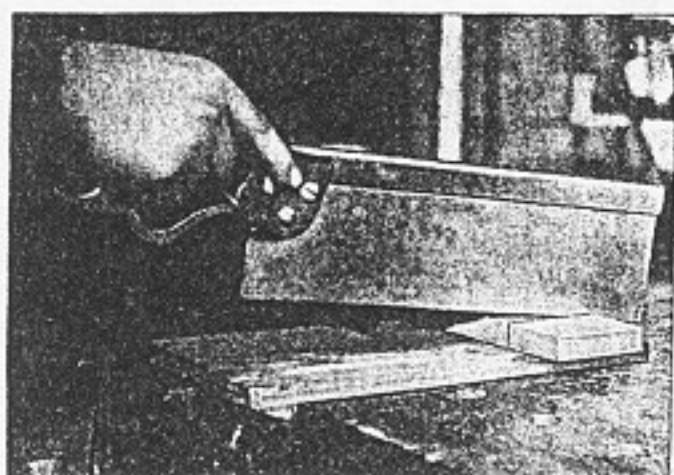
Sawing with backsaw, starting the cut. Work held on bench hook.
